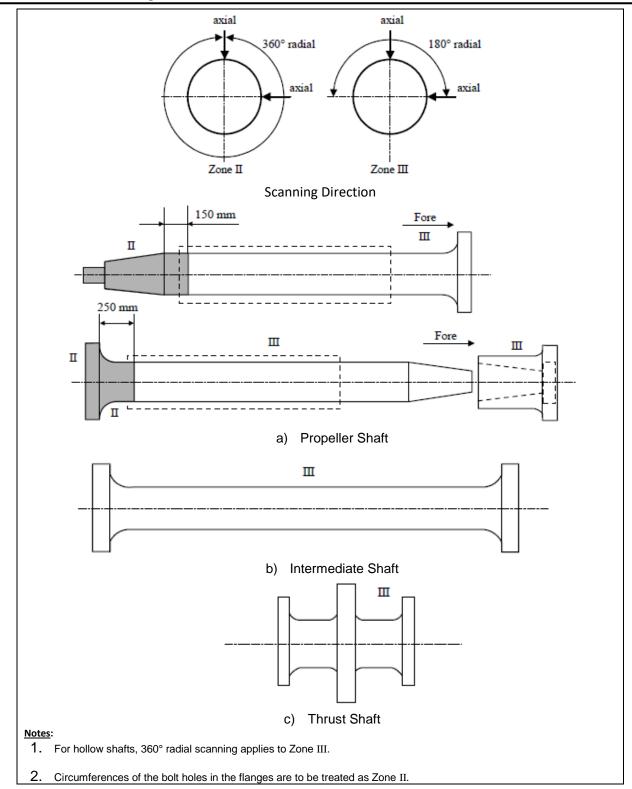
Zones for Ultrasonic Testing on Shafts
